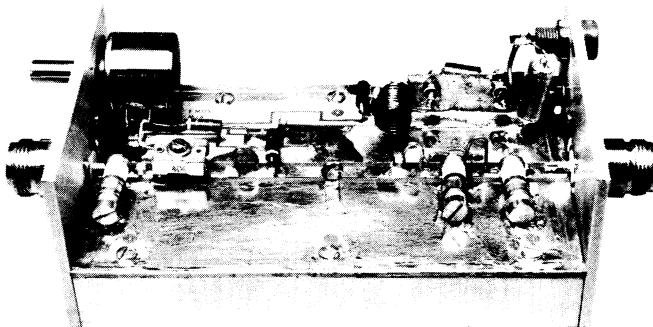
Test Circuit, Bottom View (MRF158R)
